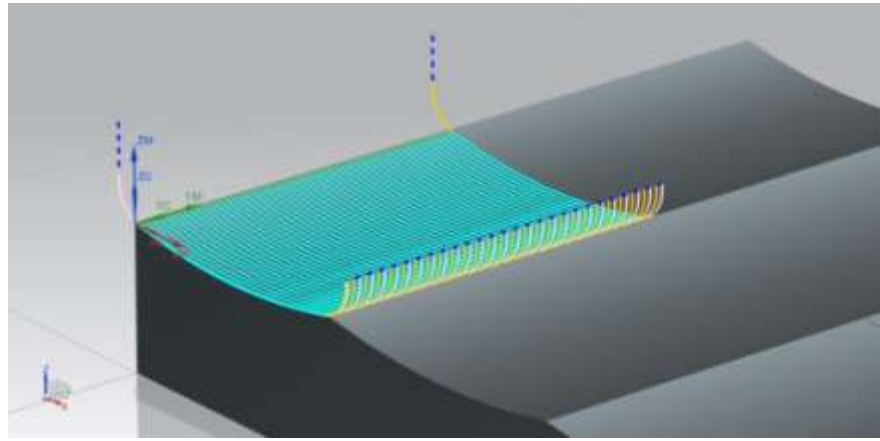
Tool path for the finishing to end in a $h_c=0,02\text{mm}$ (Zones 1 and 4).
